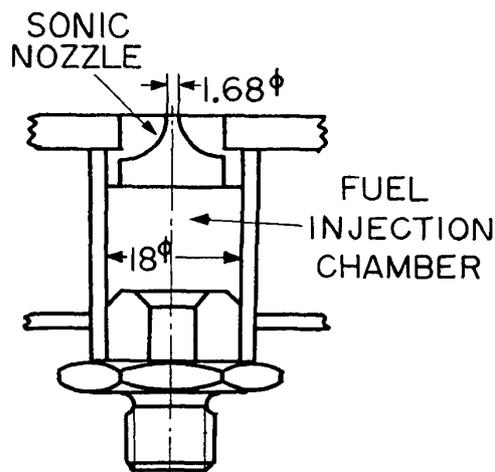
Cross sectional view of sonic nozzle. Dimensions are in millimeters.
